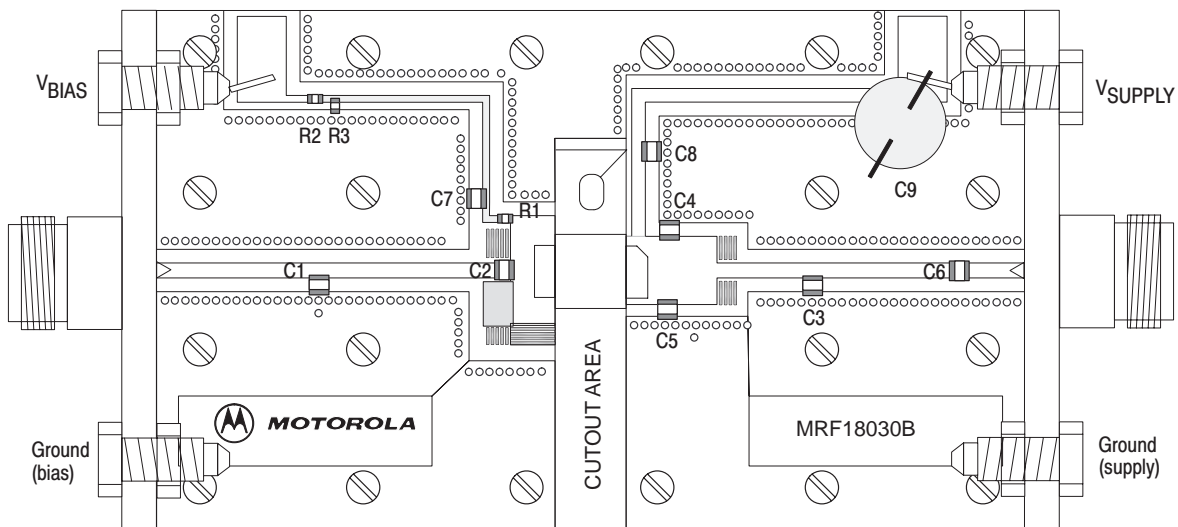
1930 – 1990 MHz Test Fixture Component Layout
